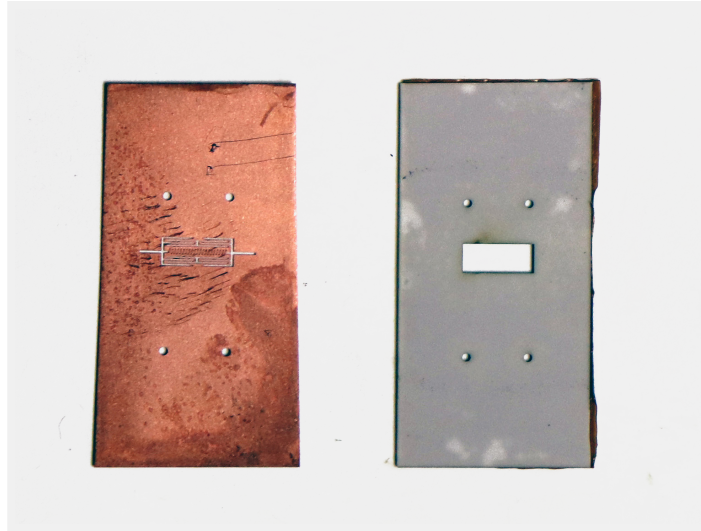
Layers of the comb-drive actuator fabricated using LAMPE micromachining. The copper layer is used for the device, and the aluminum oxide layer is used for the substrate layer.
